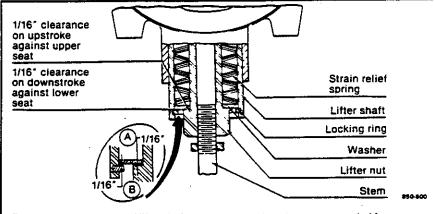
Internal view of lifter shaft assembly showing clearances needed for proper adjustment of strain-relief mechanism.
